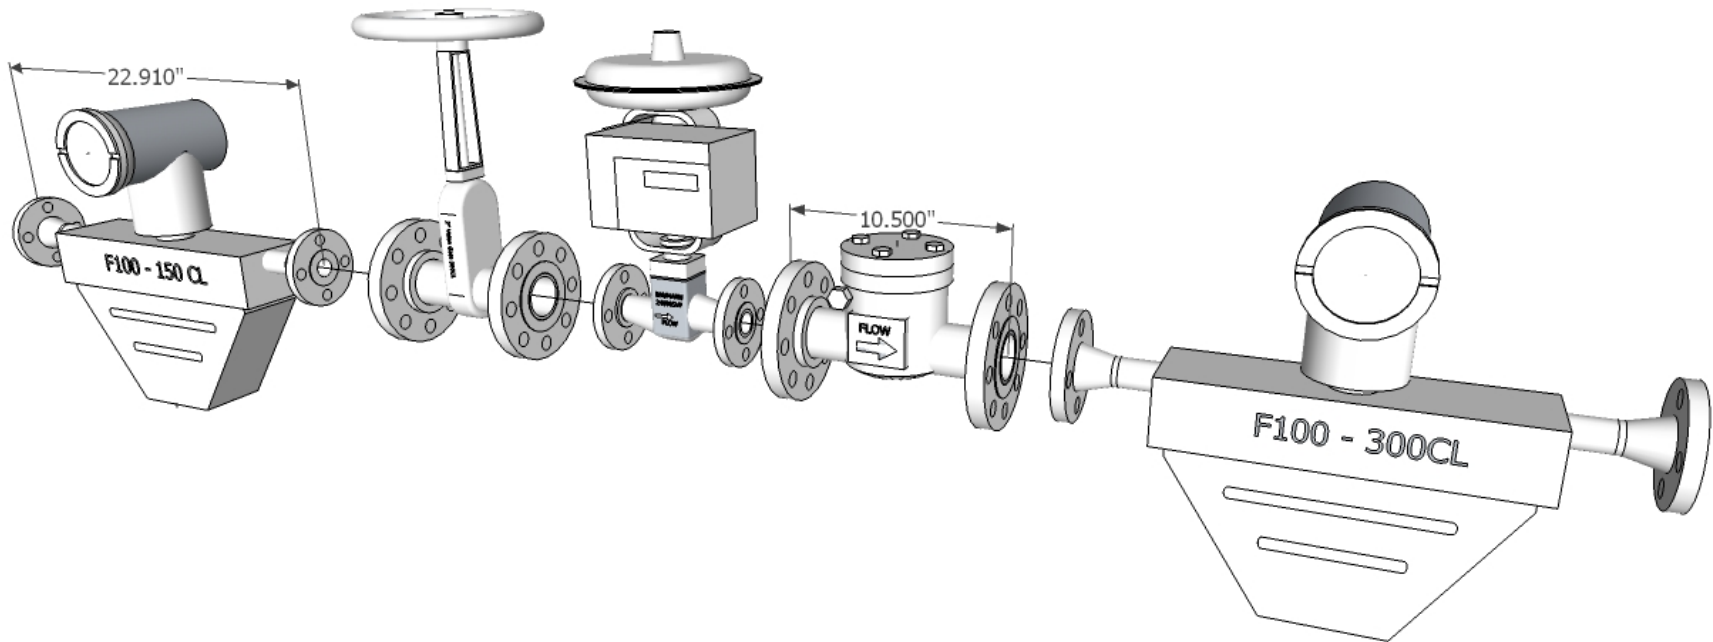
Three-dimensional view of Micromotion® flowmeters, control valve, gate valve, and check valve
